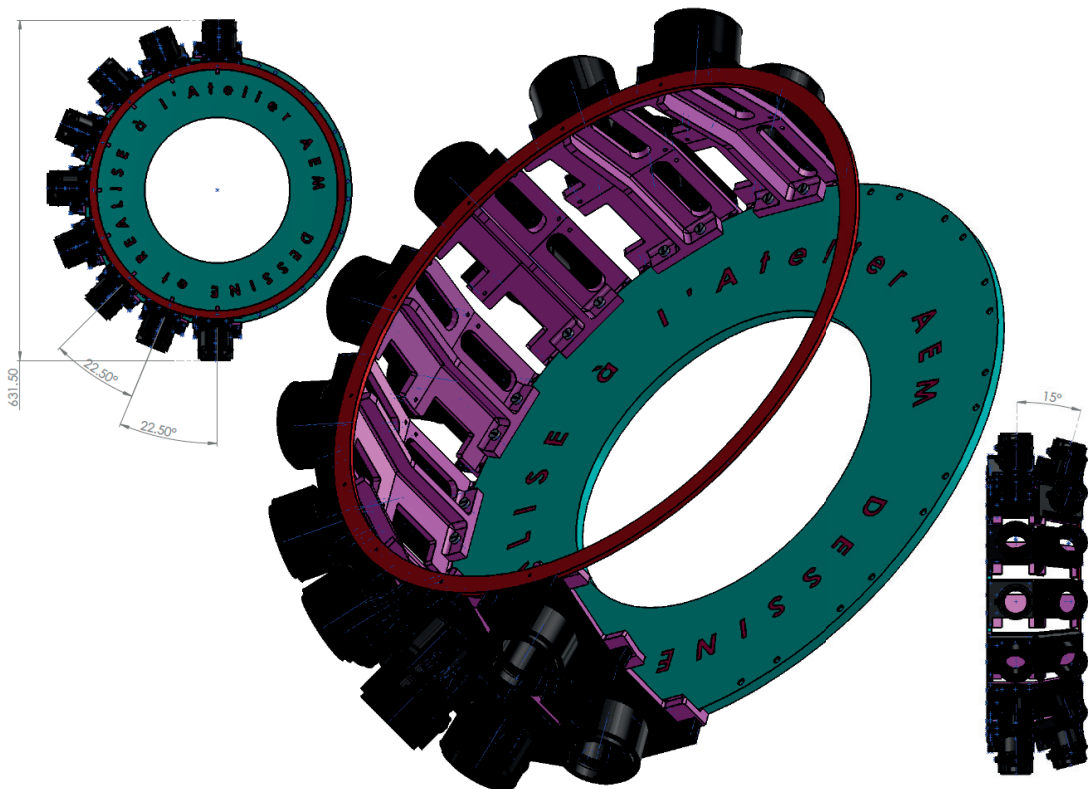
Full size technical drawing of the *GigaEye II* system.
